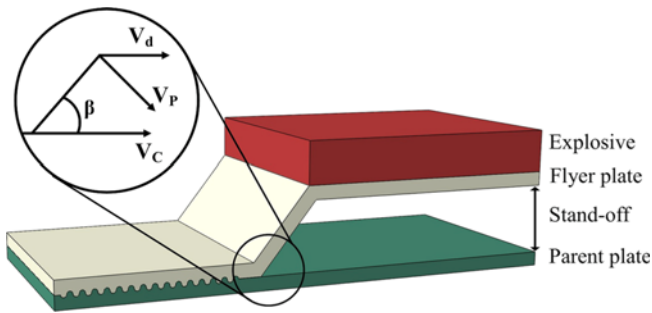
Schematic representation of the parallel arrangement for explosive welding.
